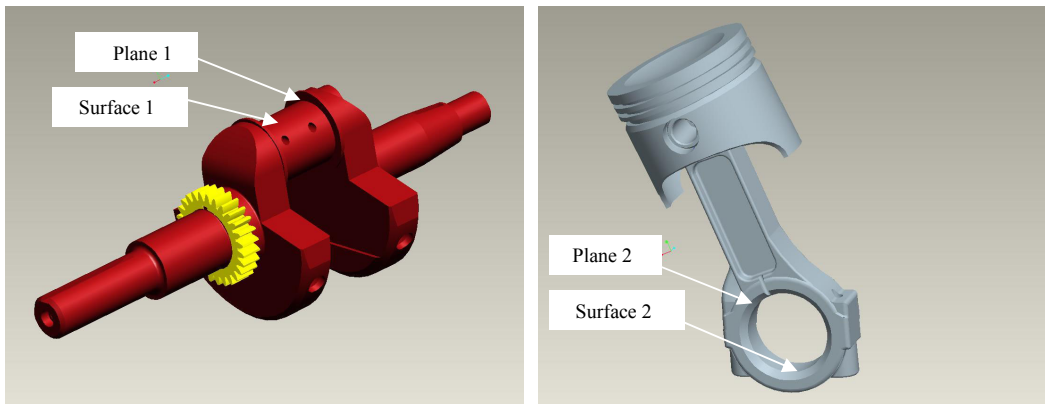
3D CAD models of a crank shaft (left) and a piston (right)
